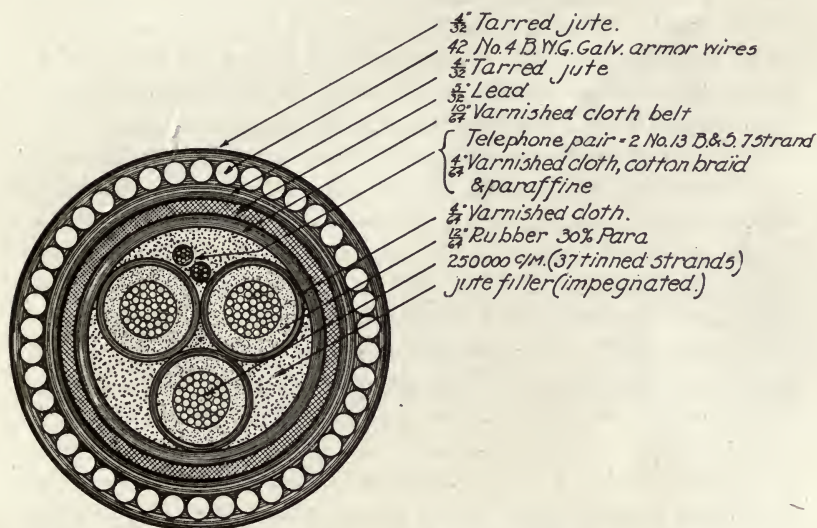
Section of submarine power cable, 11,000 volts working pressure.
